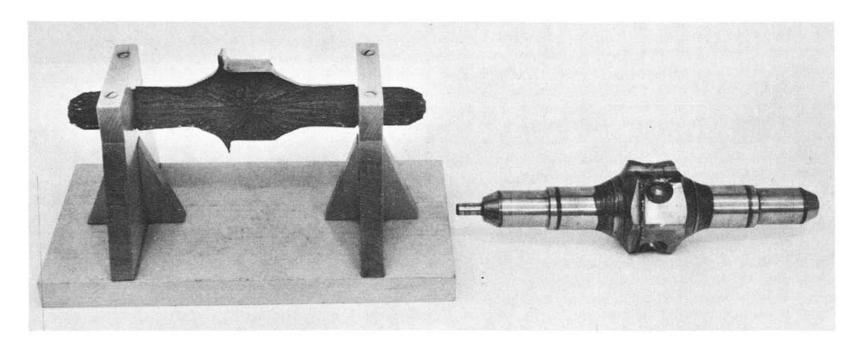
Rotor VIII (left) after explosion at 125 000 rpm and rotor IX (right) after explosion at 144 000 rpm.
